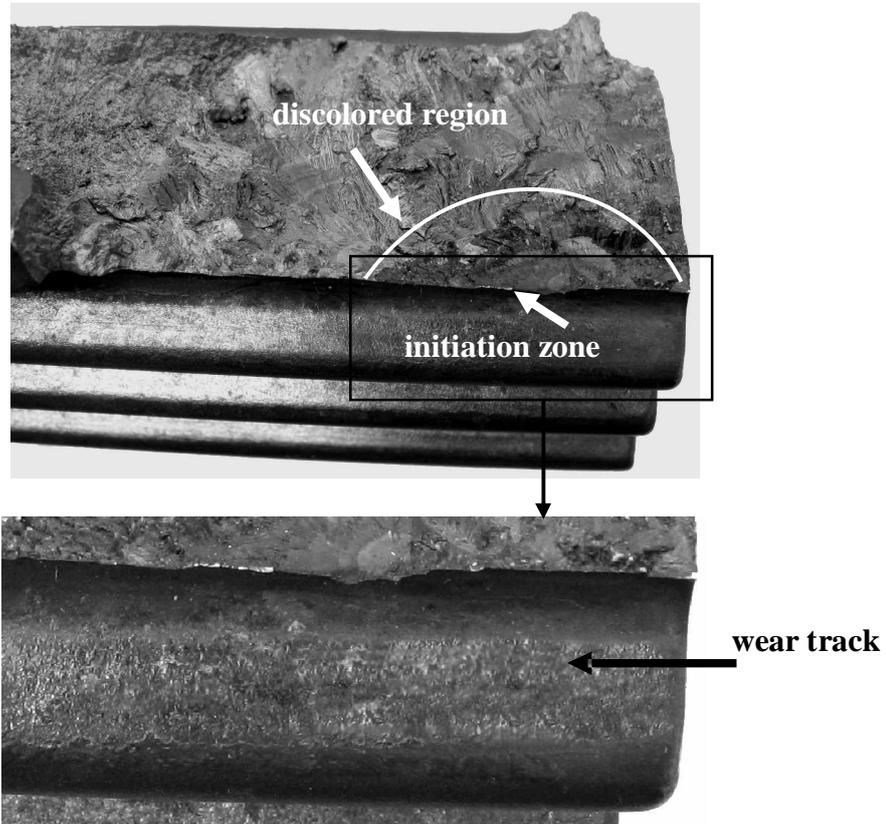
Magnified views of fatigue fracture region and a wear track .
